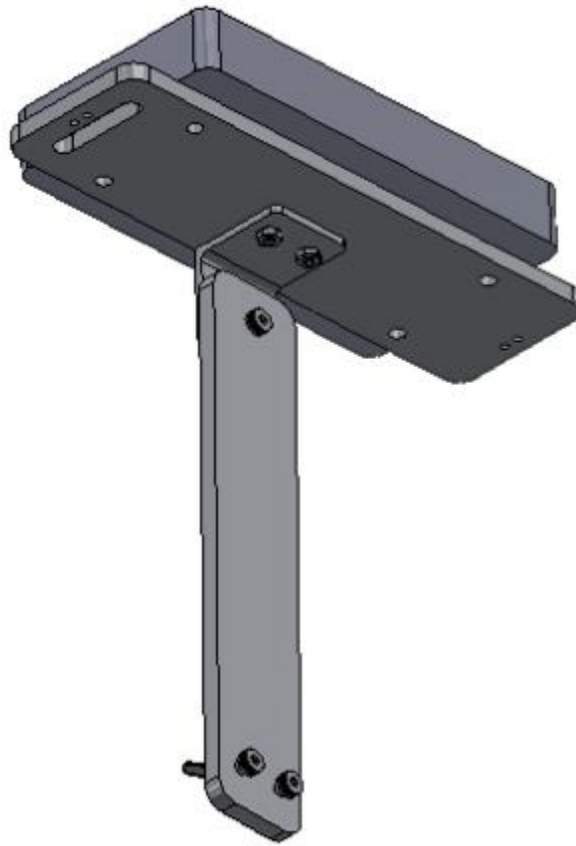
Closer view of assembly that will be supporting the frame of the PhotoBot.
